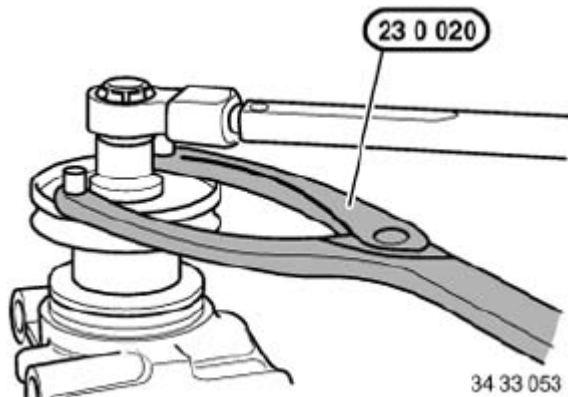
Identifying Special Tool (23 0 020) On Collar Nut
